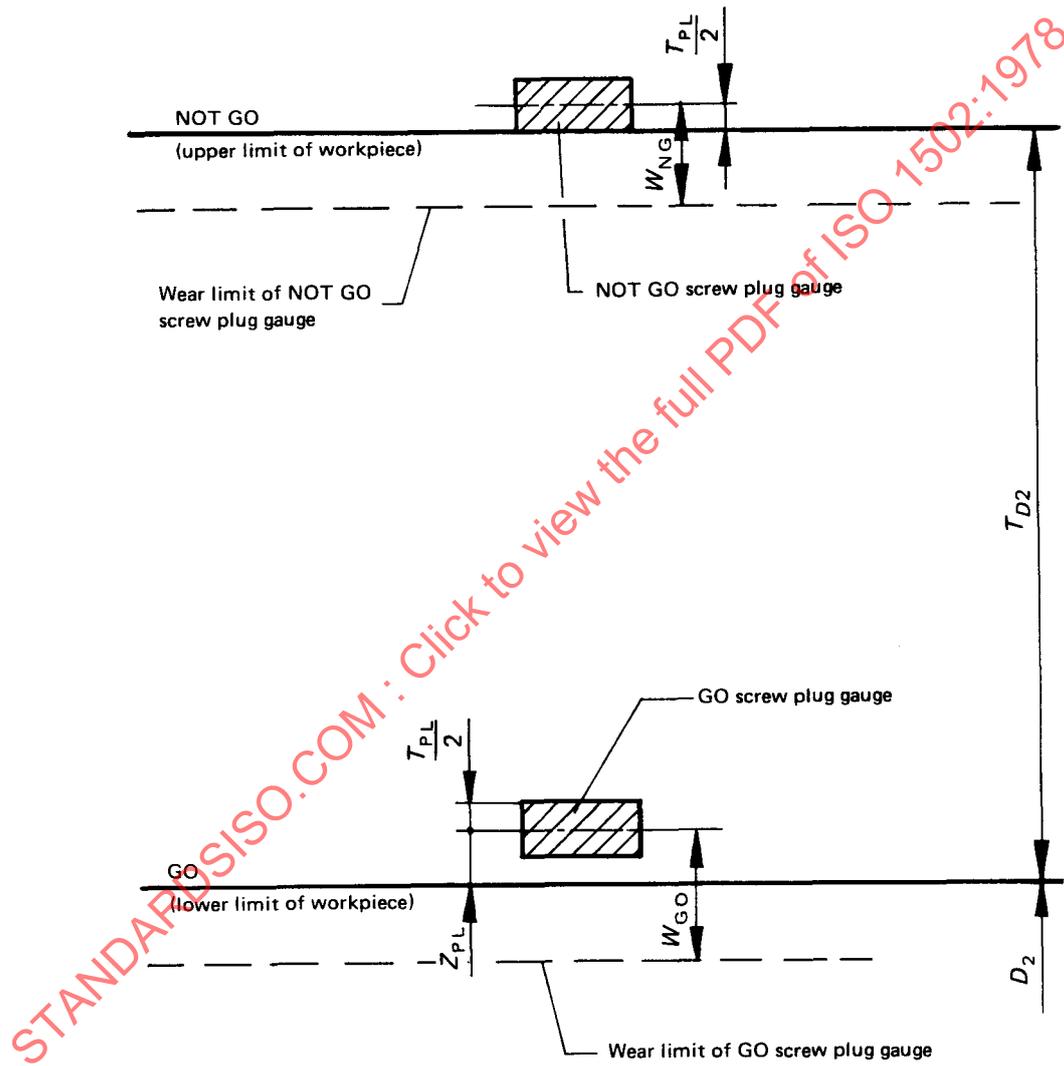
Tolerance zones for the pitch diameter of gauges for internal threads (diagram)
